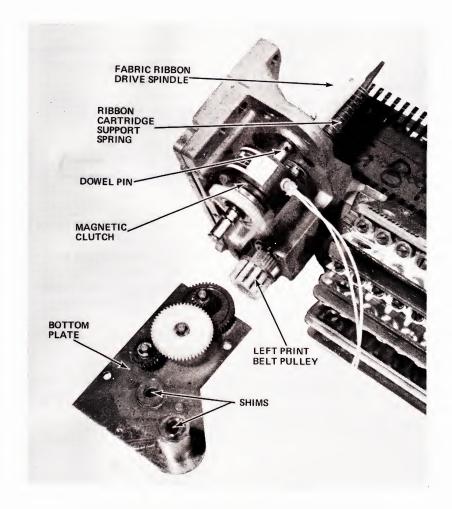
Ribbon Magnetic Drive Clutch (Side View)
